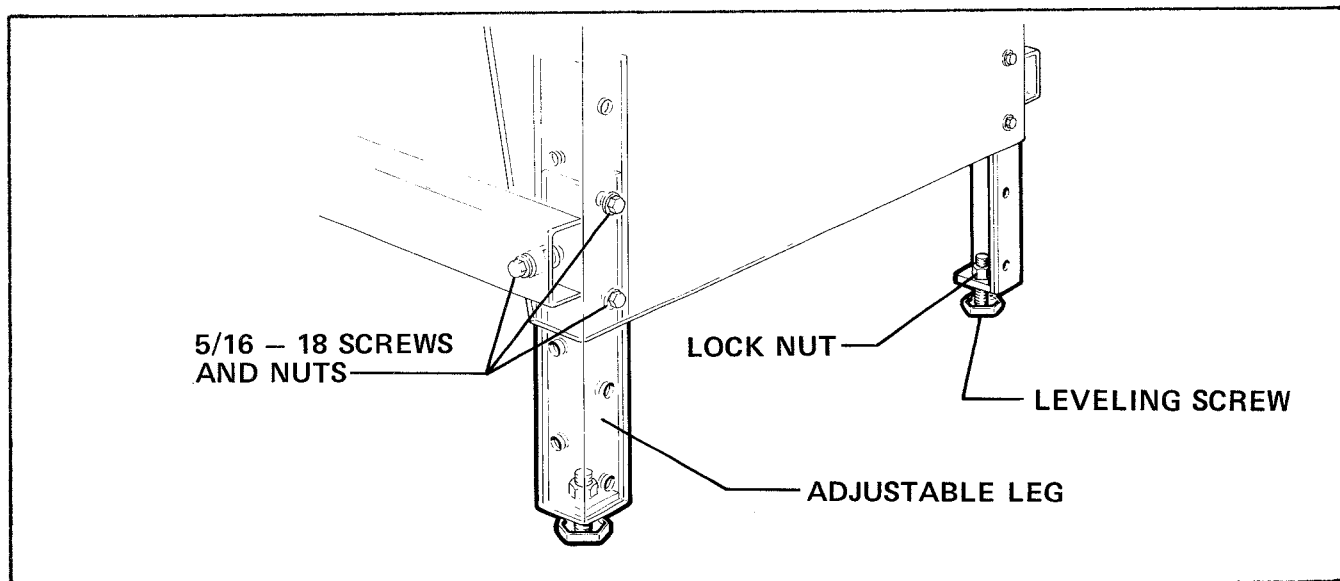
CONVEYOR BED HEIGHT ADJUSTMENT
